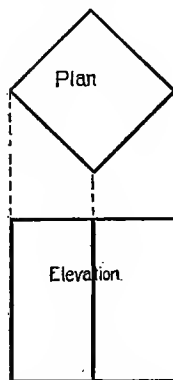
Mechanical Drawing of Fig. 49 in Position of Fig. 51
